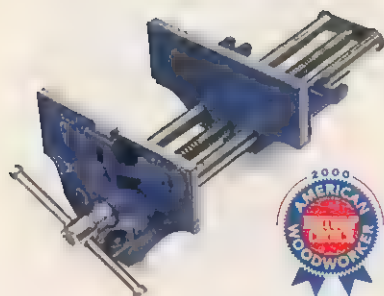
FIG. E Placing the screw closer to the right guide bar is one solution adopted by some wood-jaw vise manufacturers.
